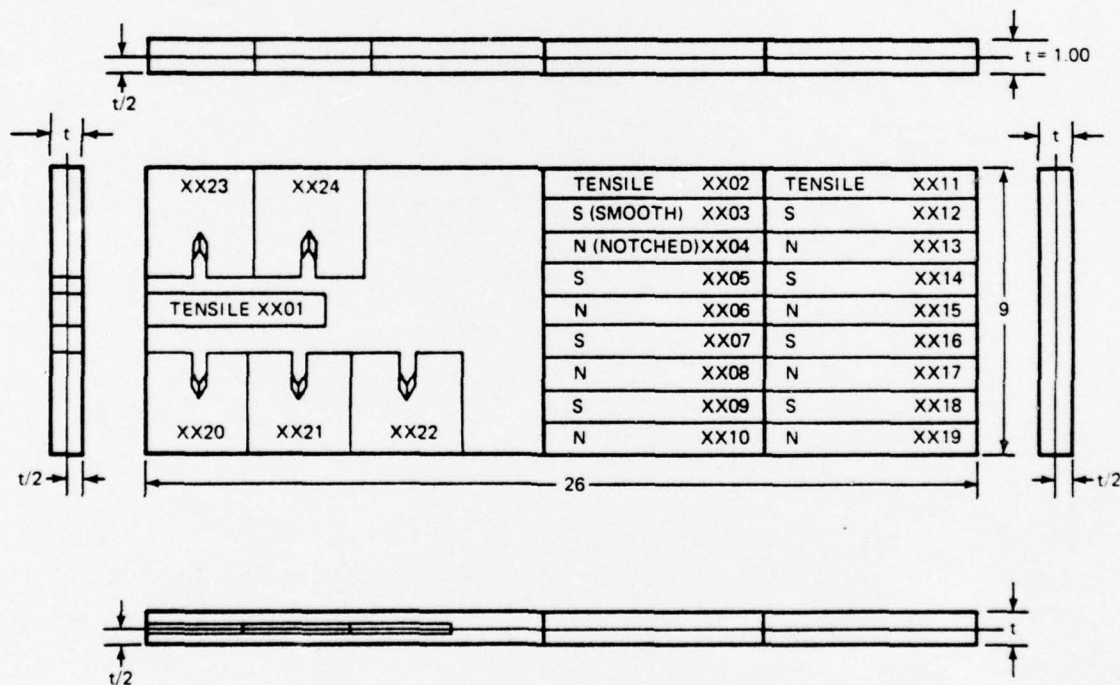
, A2, and A3 indicate forging dimensions and define the sequence of events for producing the final sections used to fabricate test specimens.
